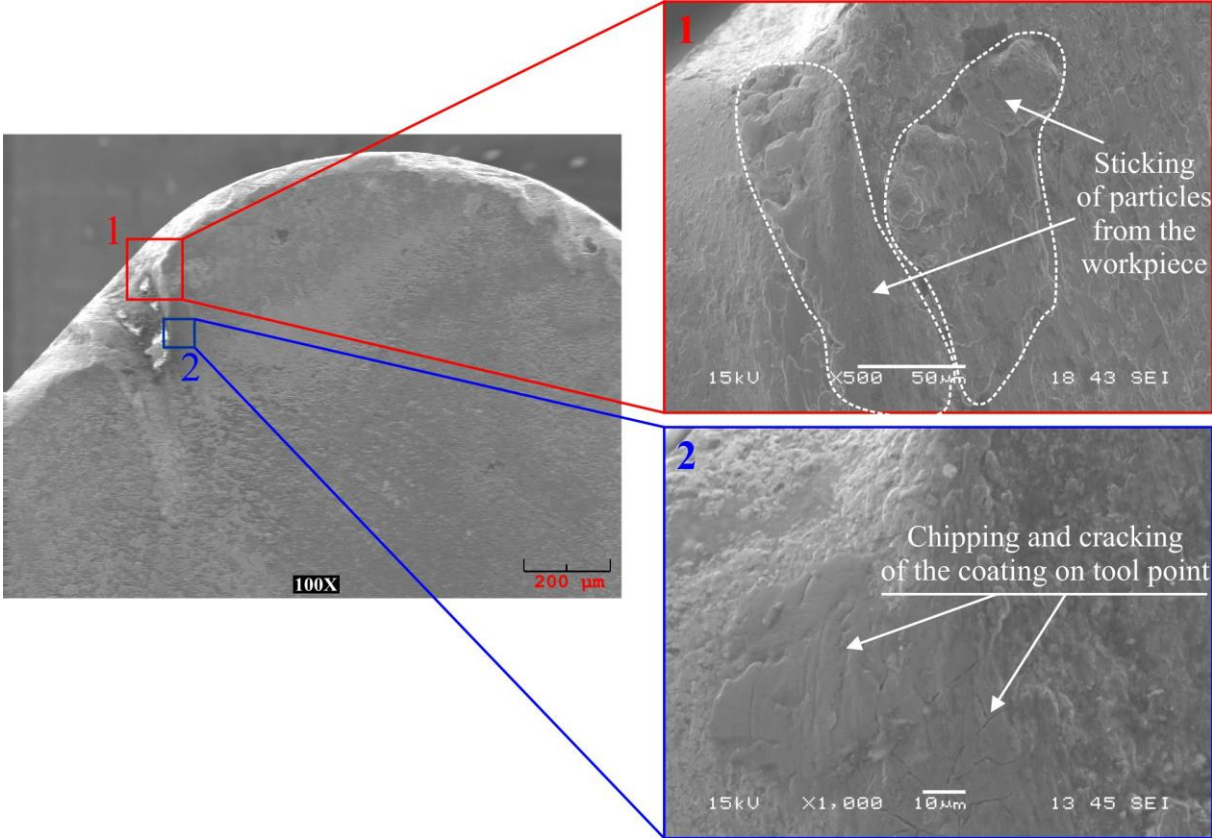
Scanning analysis of the cutting wedge/ rake face under the conditions of dry machining after turning of 316L steel
